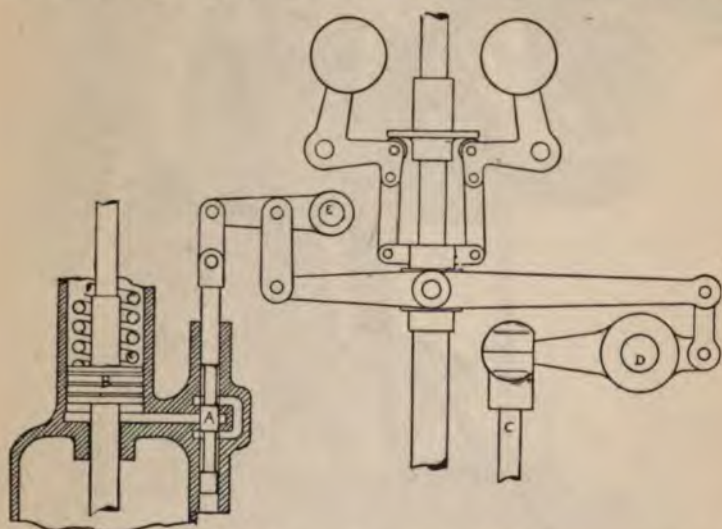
Sectional Drawing of Parsons Steam-turbine Governor. A is the Relay Valve.
